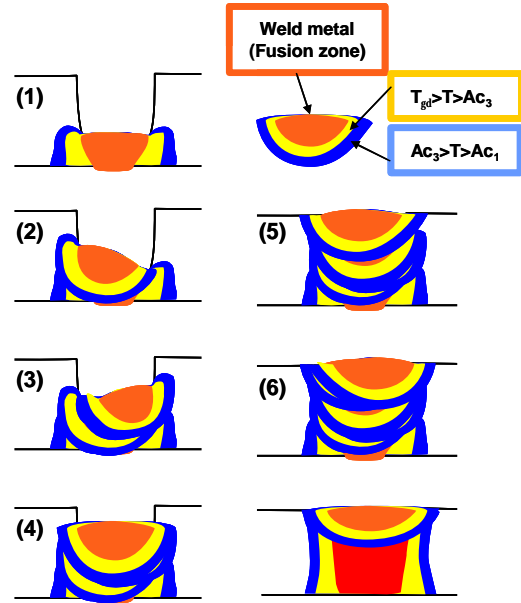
Schematic diagram of the multi-pass TIG welding process and the thermal history of weldment
